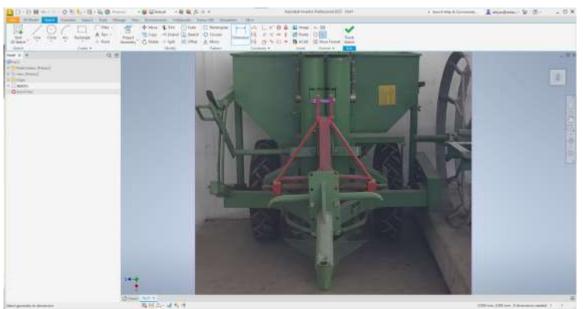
Dimension measurement (mm) of the agricultural machine with the Autodesk Inventor Pro software
